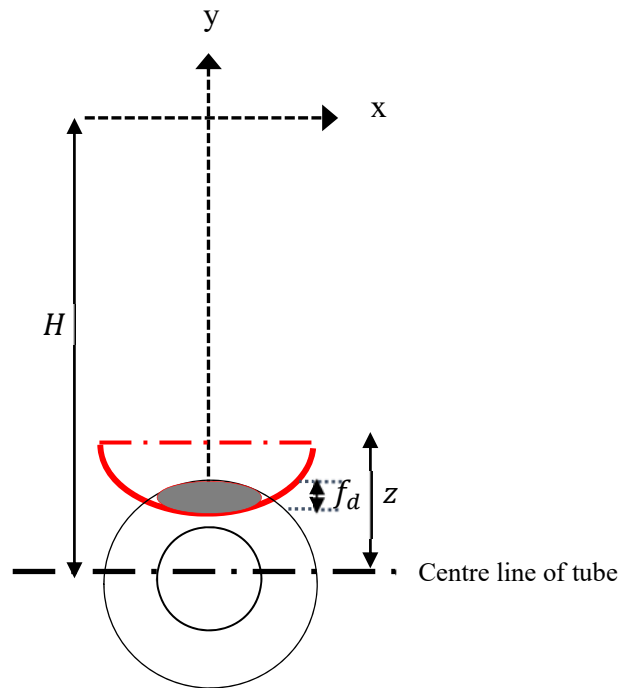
Schematic showing the modelling of a u-shaped or scoop shaped flawed tube - cross-section.
